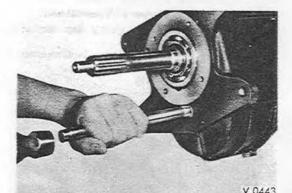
Removing the counter gear shaft from the transmission case.
